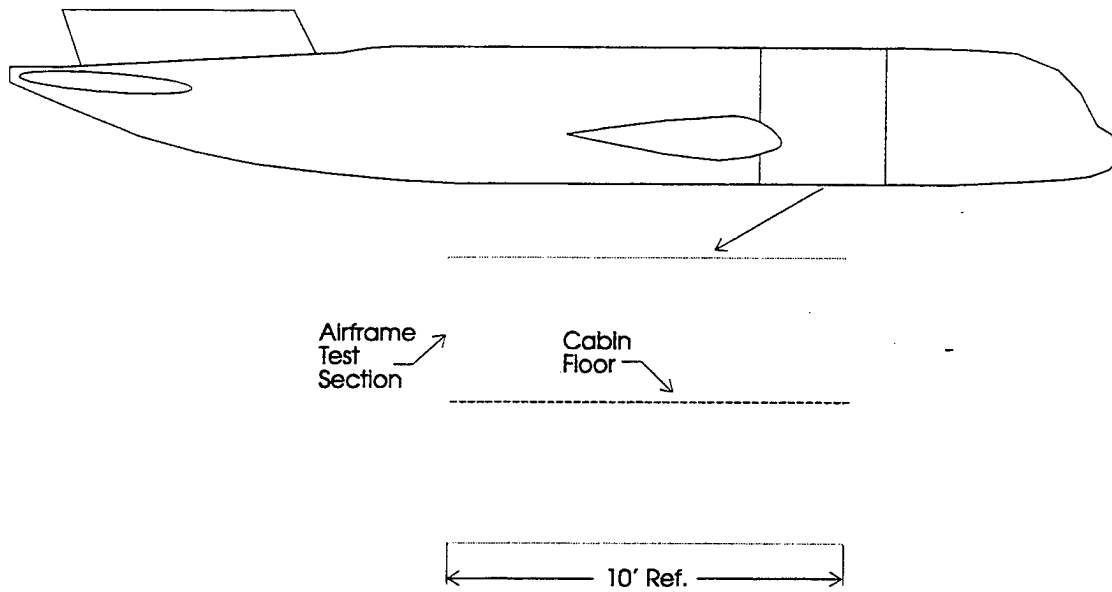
AIRFRAME TEST SECTION AND FLOOR PLAN
